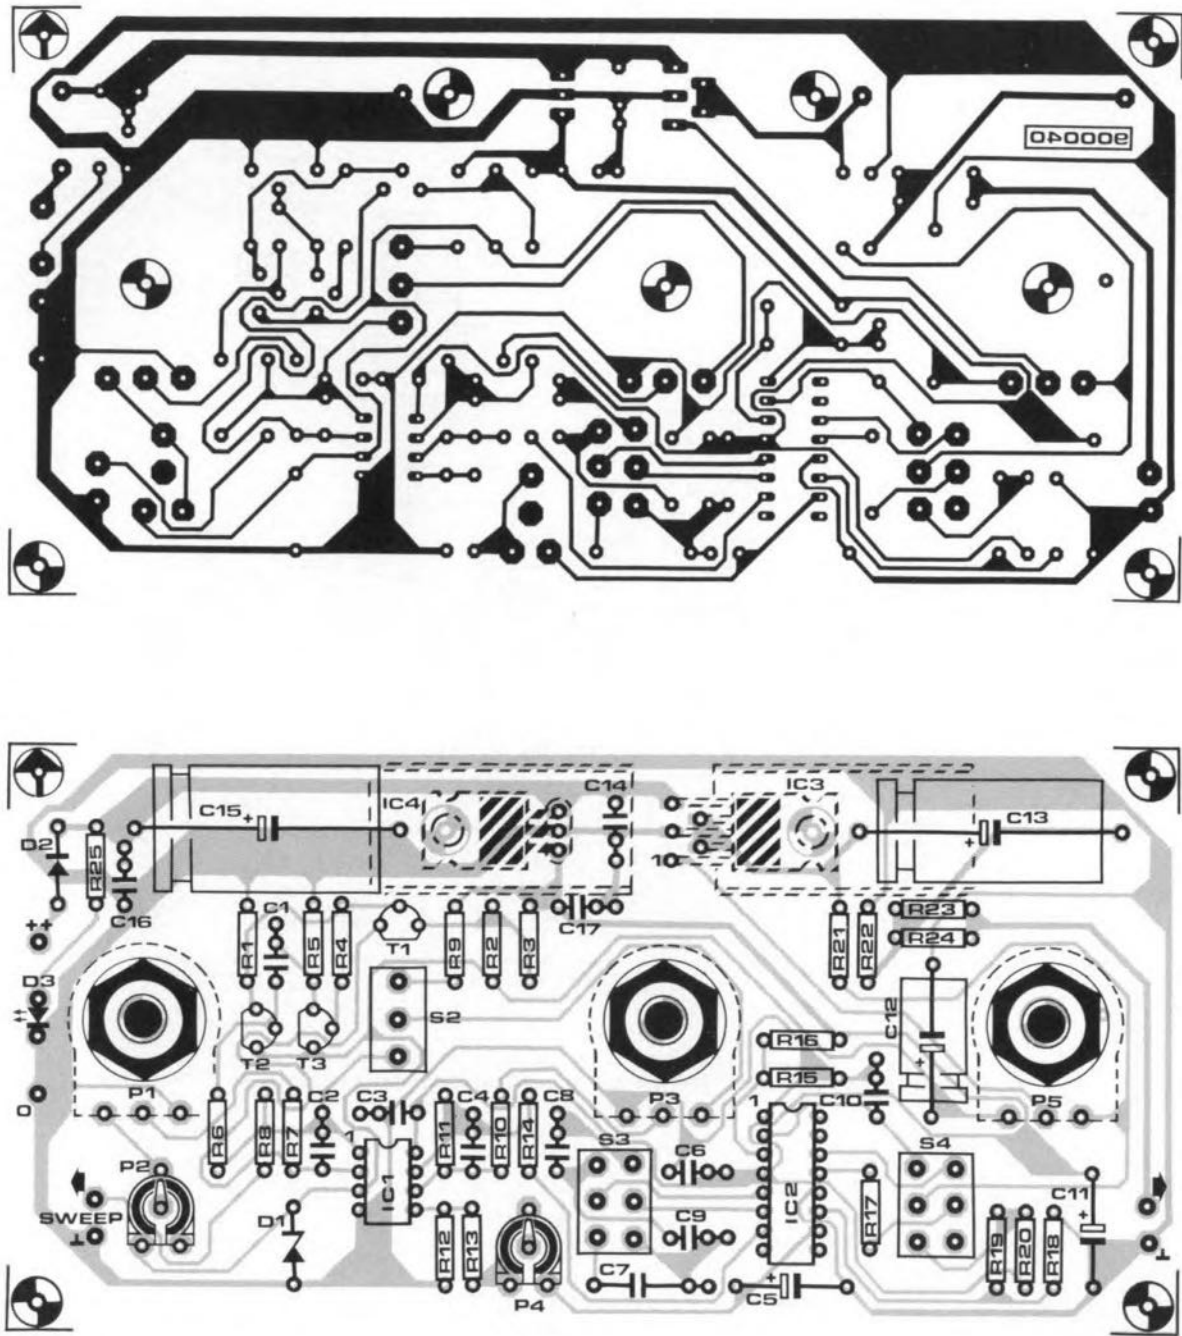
Track layout (mirror image) and component mounting plan of the single-sided printed circuit board for the generator.
